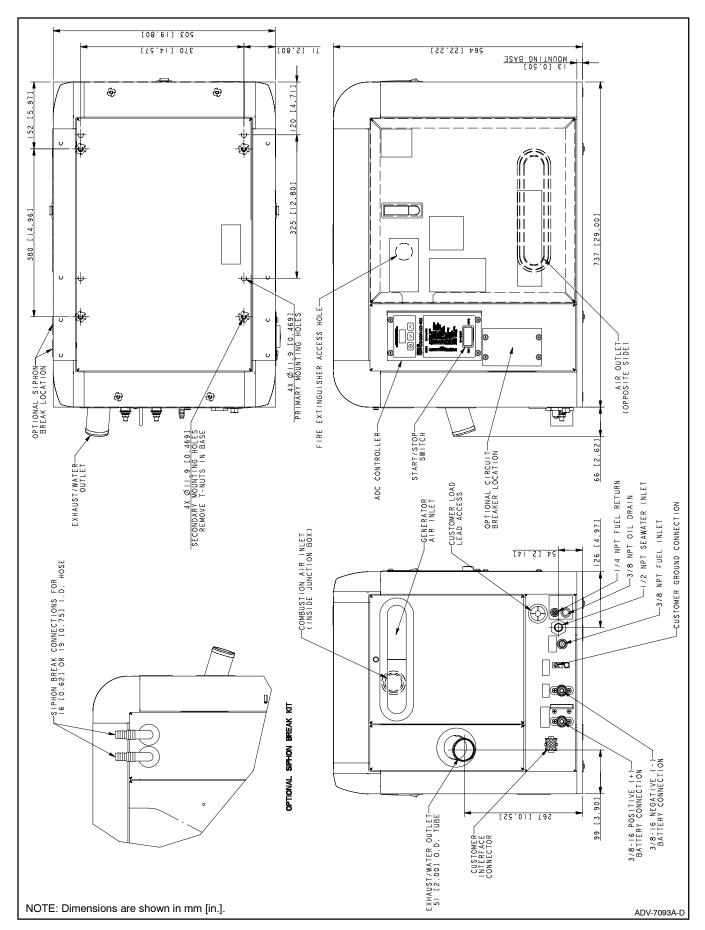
Dimension Drawing, 6EOD/4.5EFOD with Sound Shield
